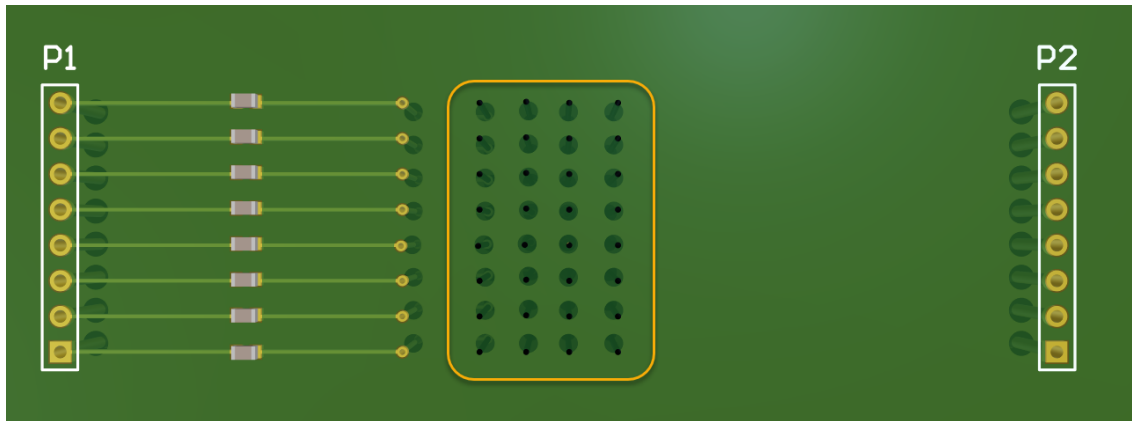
Top of PCB in 3D view showing holes without metal for the Back Drilled vias
